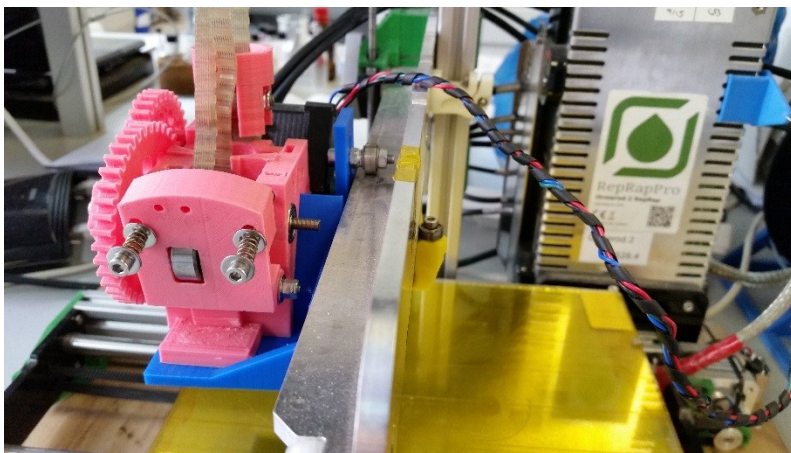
Caddy runner bearing riding atop x-axis rib (left of vertical x-axis arm) and x-axis carriage runner bearing (right of x-axis arm).
